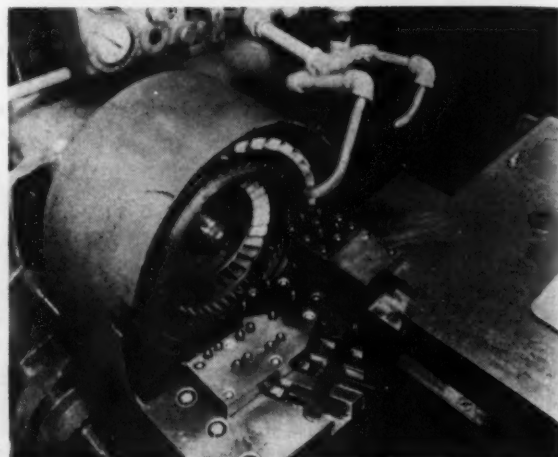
Machining turbine and over-run coupling assembly. Excess stock is faced from the inner and outer shells. There are six tools on the left-hand head and two on the right.
